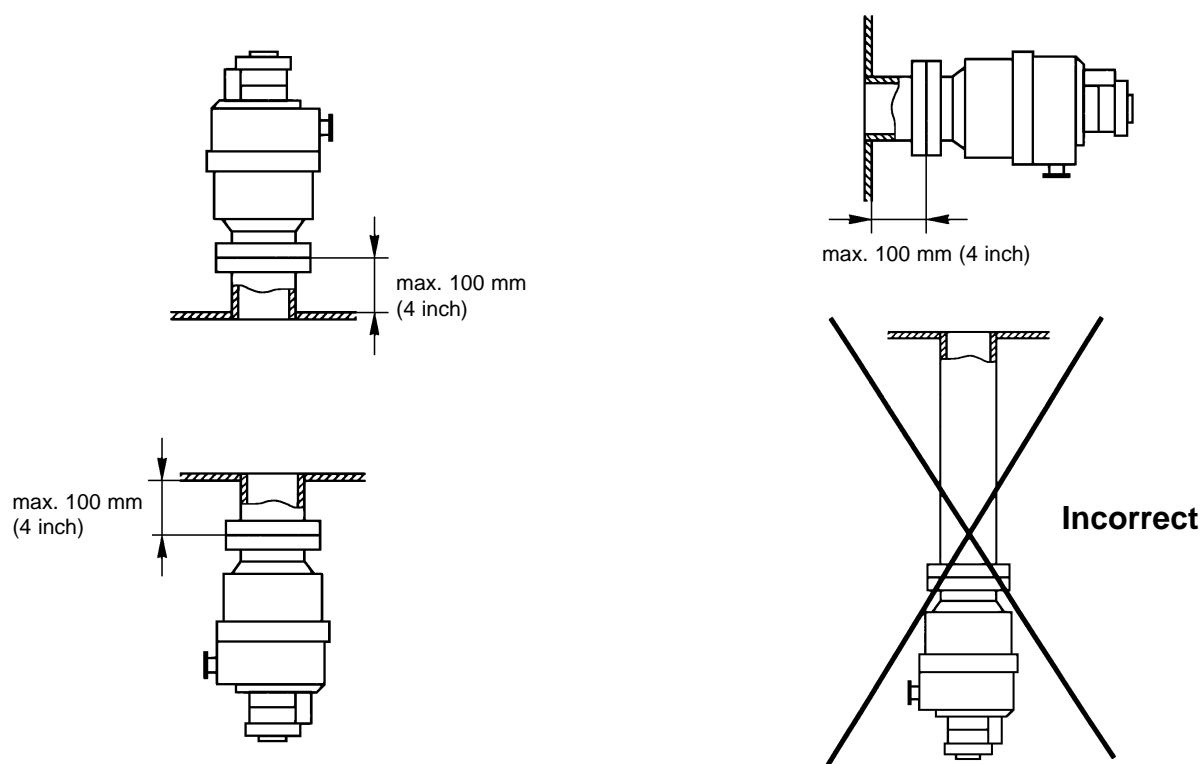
Permanent flanging of the TURBOVAC to the vacuum chamber
